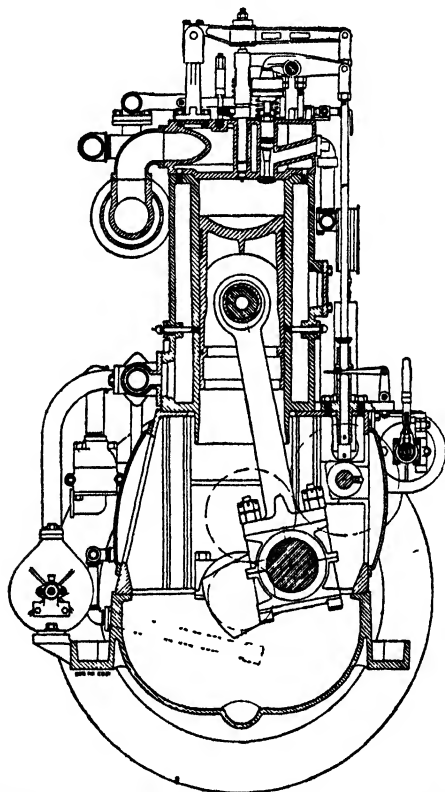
Atlas-Imperial Diesel has camshaft in crankcase, and geared to crankshaft.
